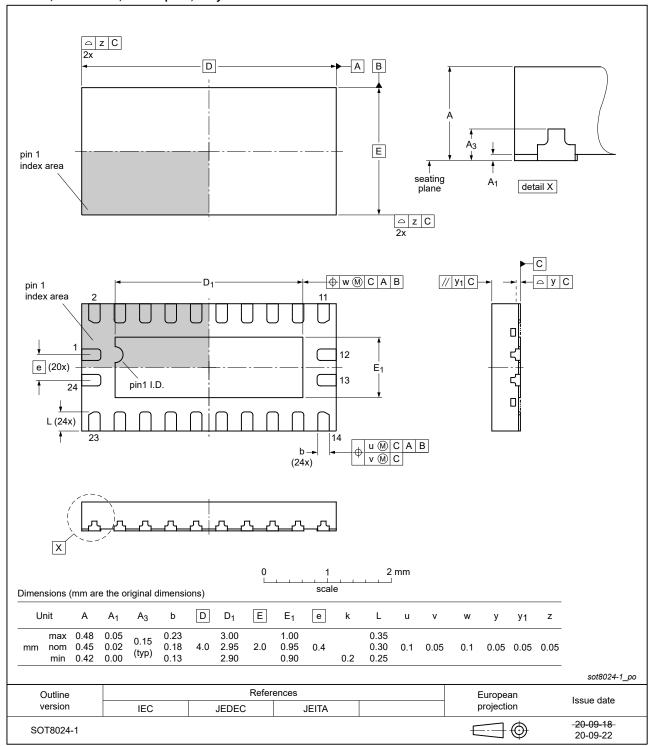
Package outline SOT8024-1 (DHXQFN24)
